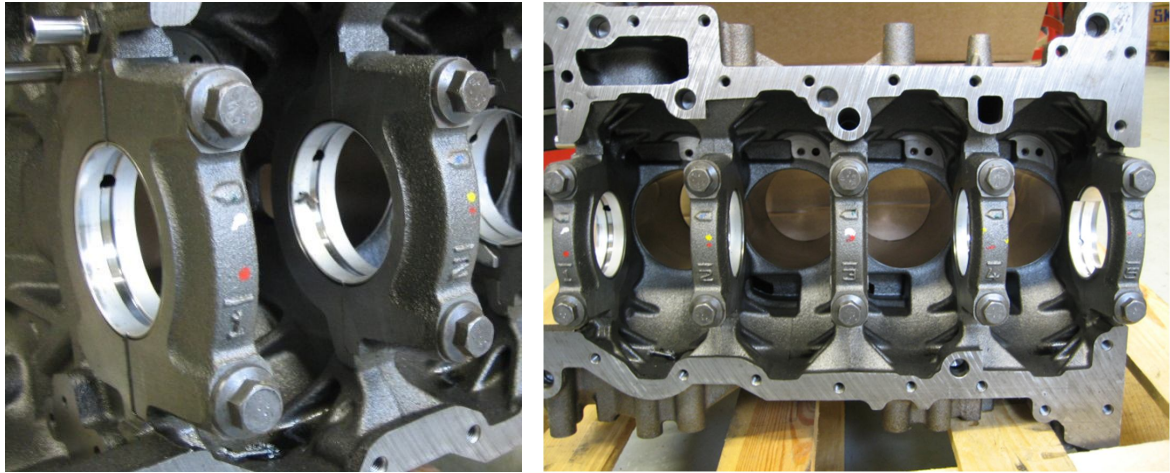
Main journal bearing detail showing a) oil delivery hole to lubricate shell bearing b) five main journal bearing caps
